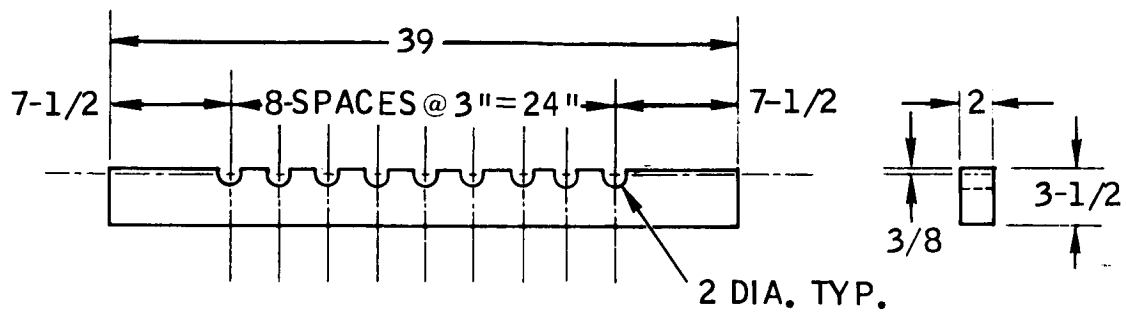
Removable End Insulation & Filler (Item 63, 64)
